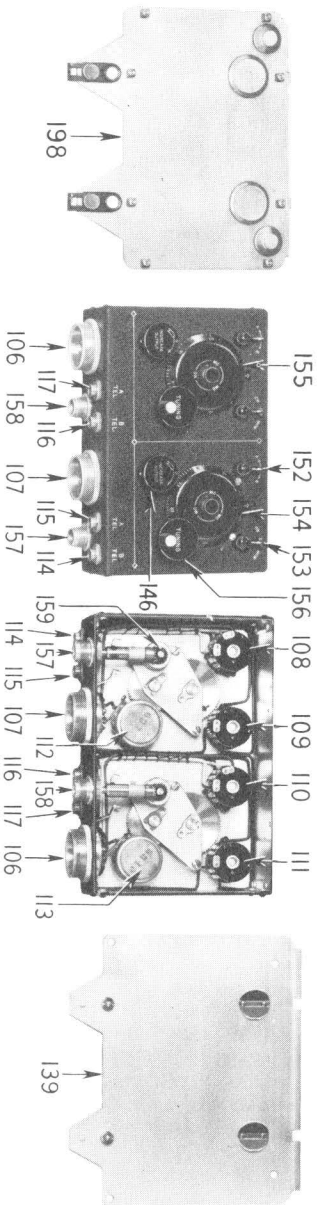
TYPE CBY-23155 RECEIVER CONTROL BOX, FRONT AND REAR VIEWS, WITH BASE AND MOUNTING
